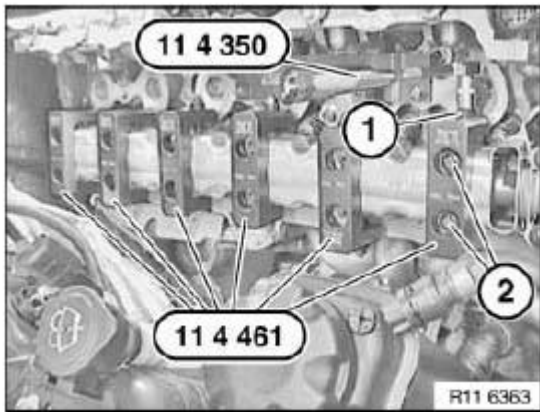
Identifying Special Tools (11 4 461), (11 4 350), Screw And Connections
